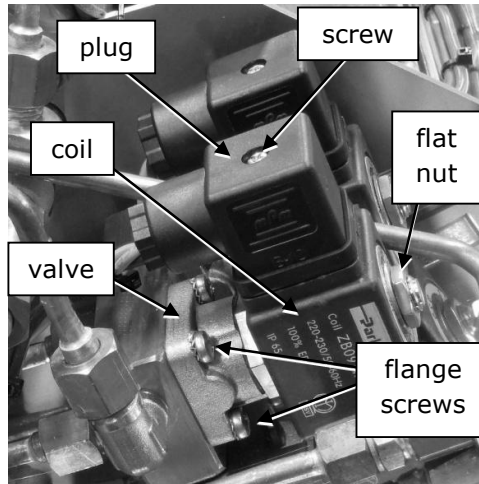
Detail of (2-way) flange valves on hot water manifold.
